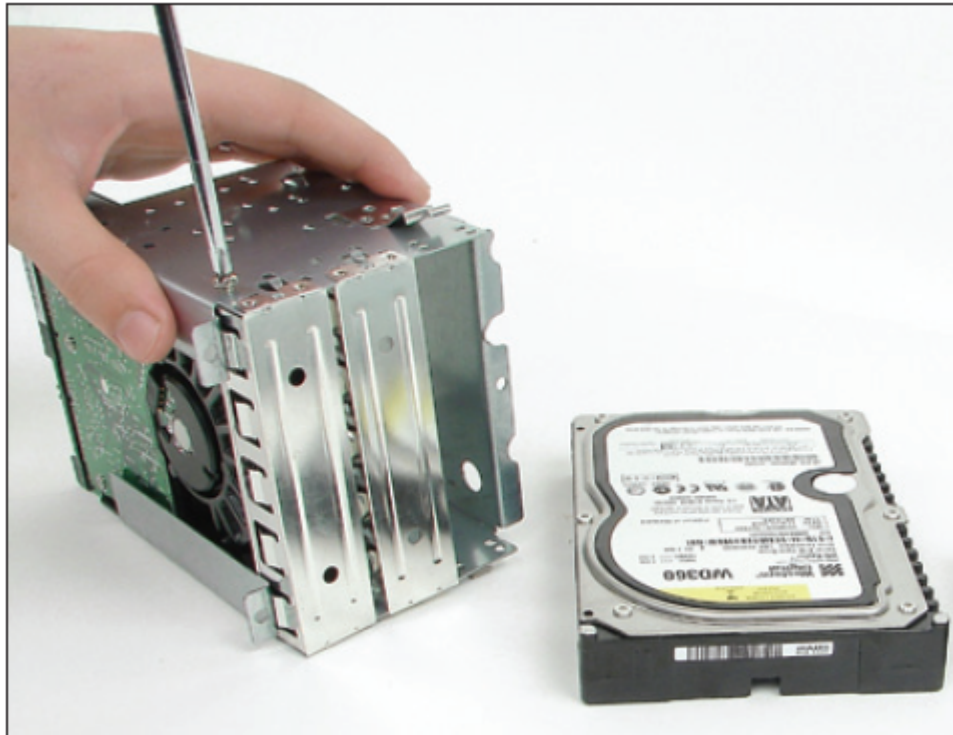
Drives in this removable bay are held in place with screws on each side of the bay
